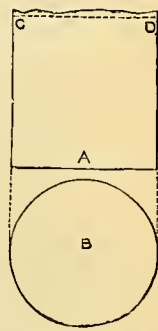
MAKING EVEN EDGE OF TIN OPENED AT SIDE. A, Elevation. B, Plan.
